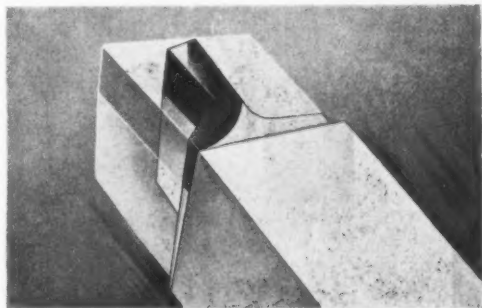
Bar Tool Modified to Form a Parting and Chamfering Tool
